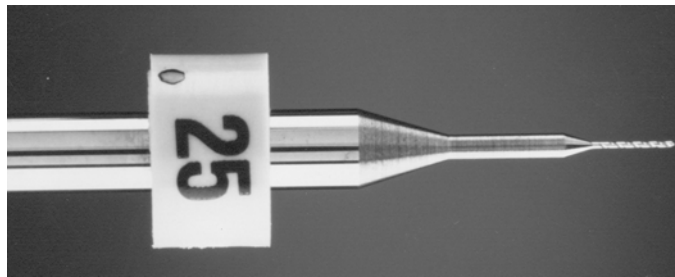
A printed circuit board drill with a tip diameter of 0.25 mm.
